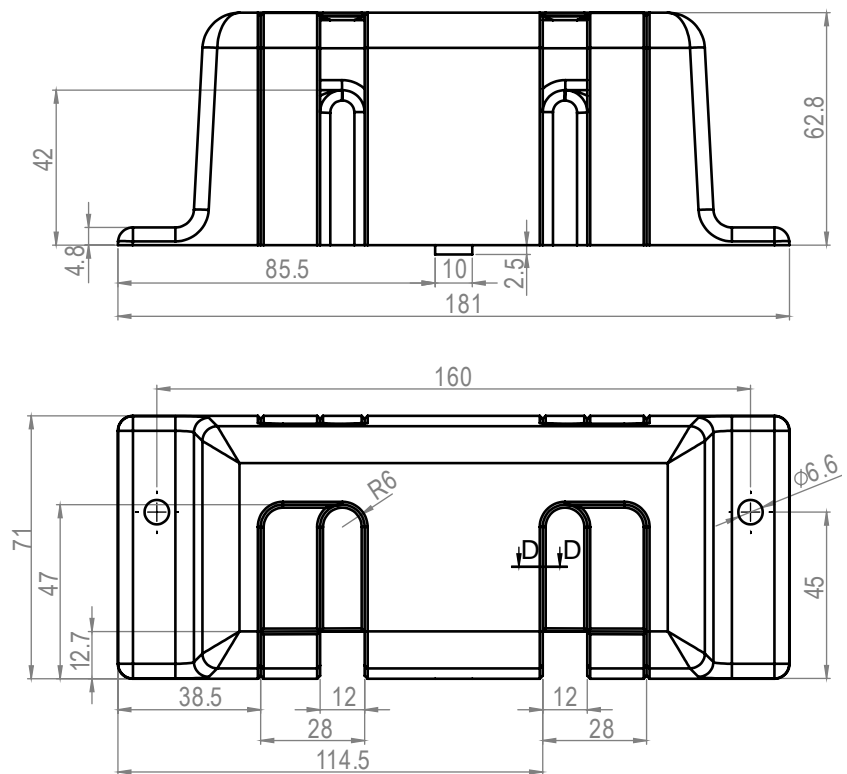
PACOB dimensions for TC.GSS devices in mm.
